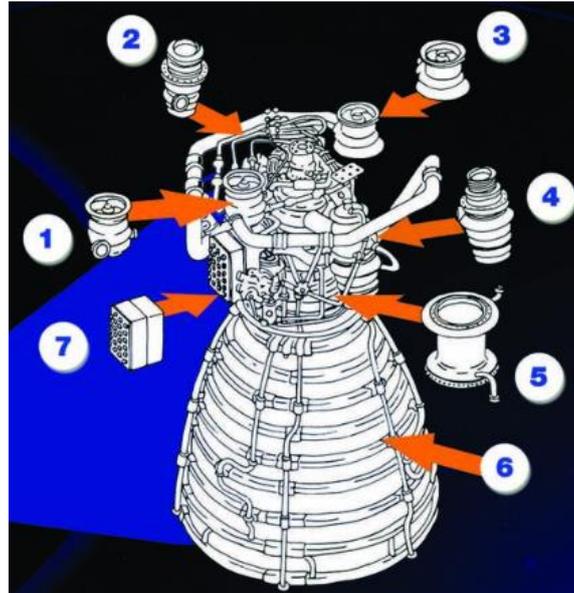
Illustration of the RS-25 engine and the use of metallic materials in place of ablative ones, and show the main parts of the engine: 1-4 - Turbo Pumps, 5 - Main Combustion Chamber, 6 - Nozzle, 7 - Engine Controller.
